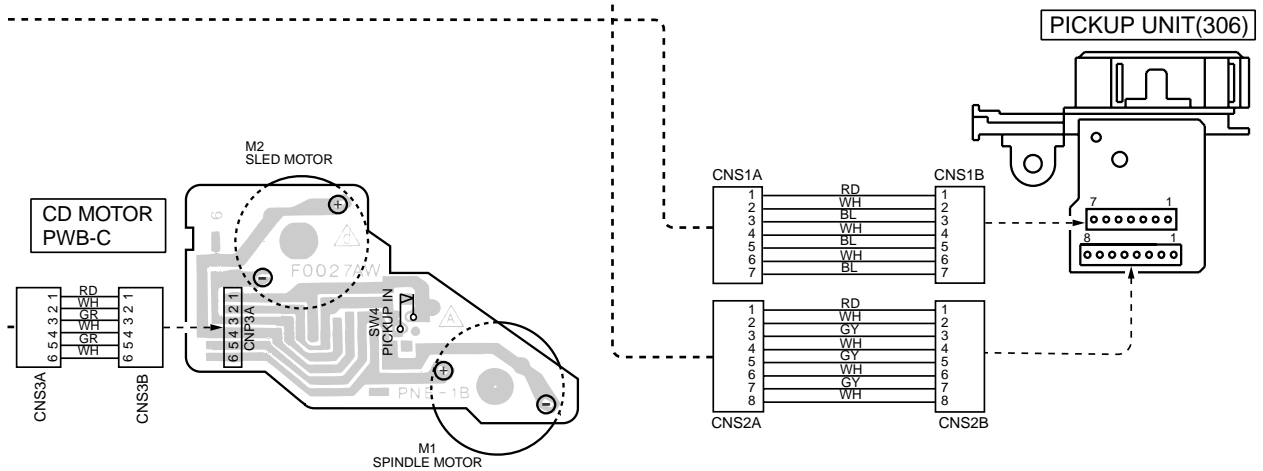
WIRING SIDE OF P.W. BOARD (7/8)
